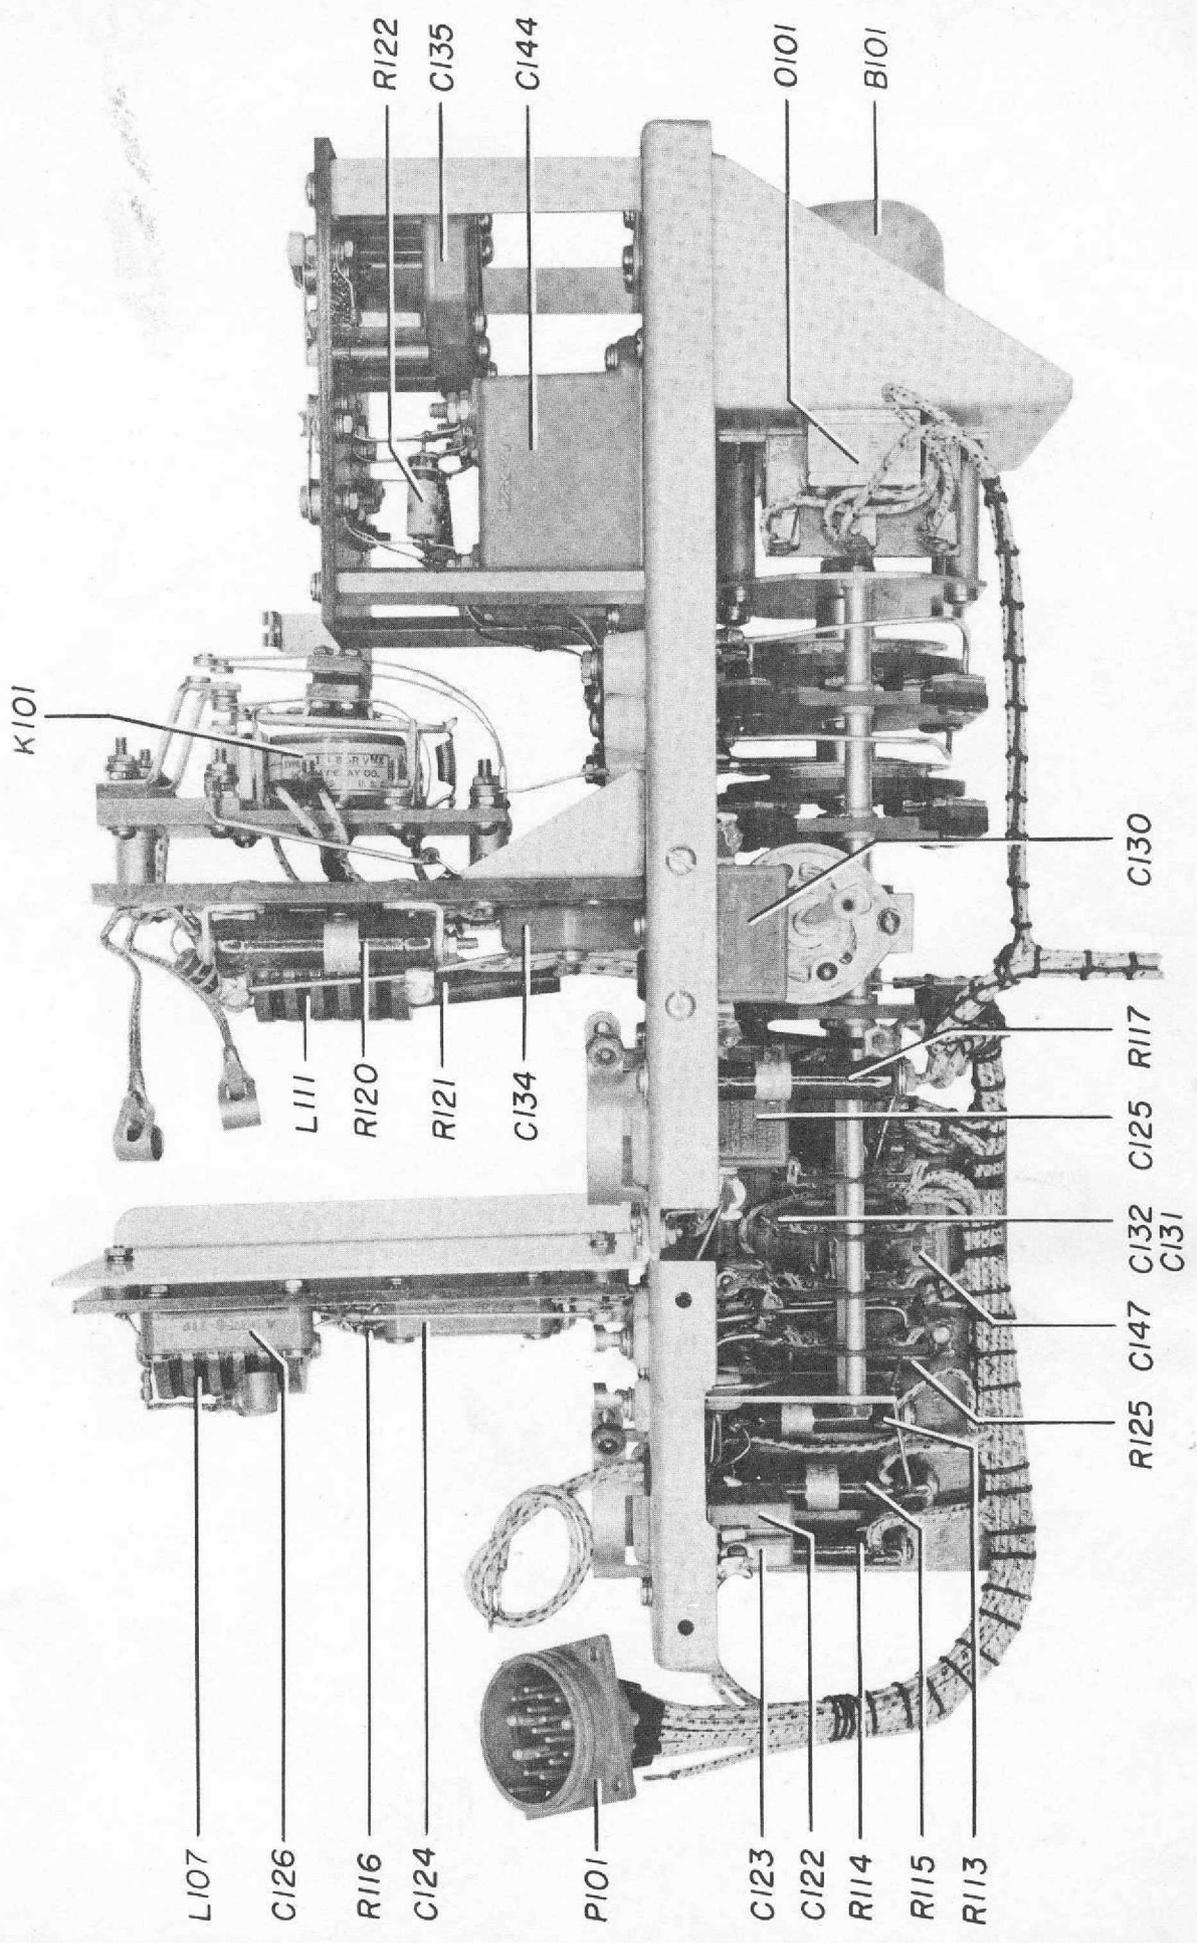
FRONT VIEW CHASSIS ASSEMBLY
